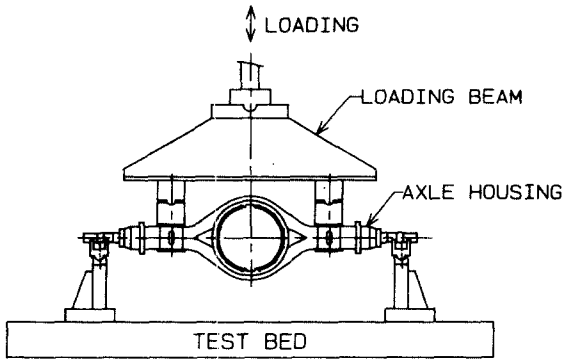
Arrangement for the four point bending fatigue testing of the rear axle housing.
